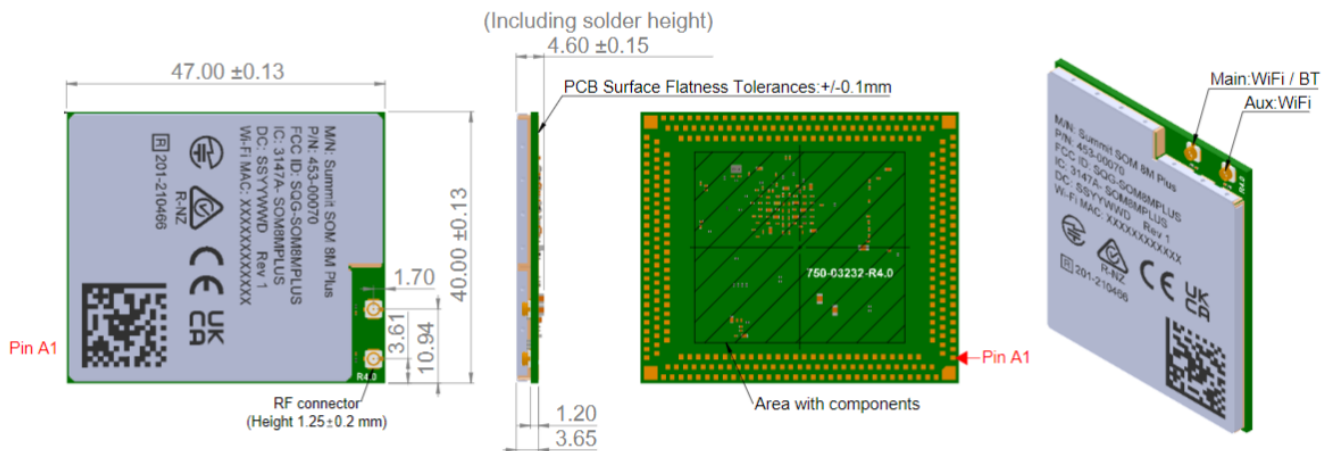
Mechanical drawing – Summit SOM 8M Plus module
